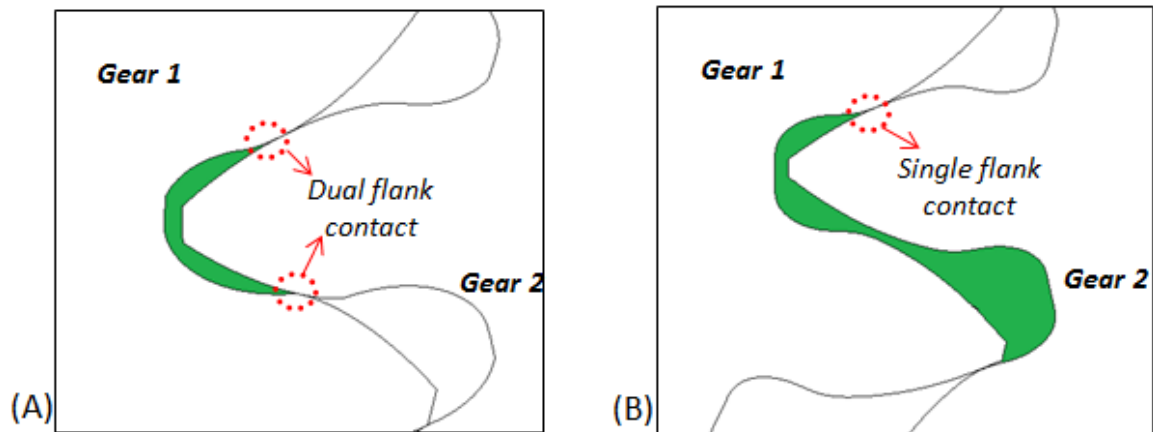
(A) Gears with dual flank contact; (B) Gears with single flank contact.
